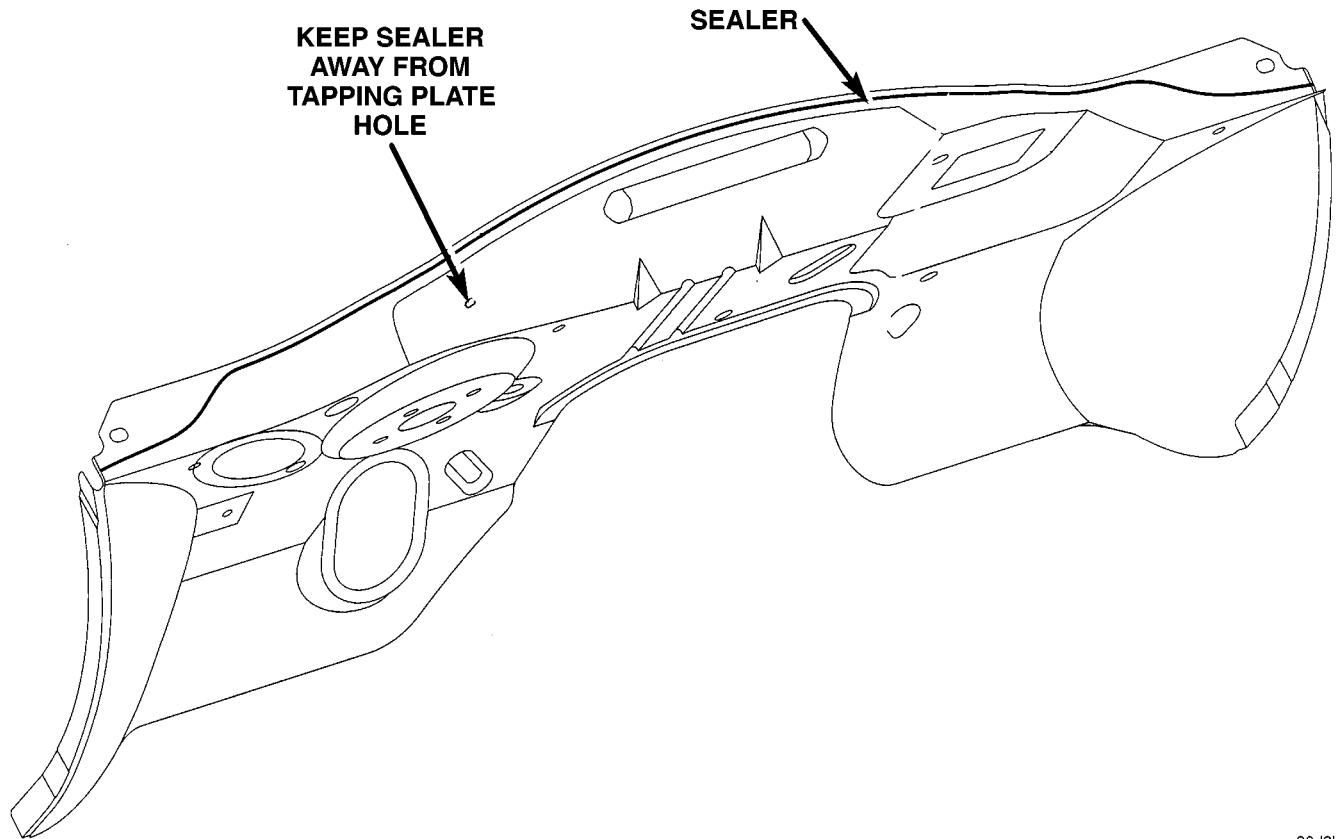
DASH PANEL & LOWER COWL PLENUM
